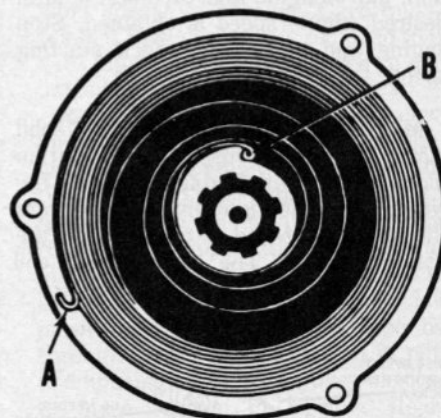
View of rewind spring installation in starter cover. Hook outer loop (A) of spring in notch as shown. Inner loop (B) of spring must be curved inward to engage notch of spring lock.
